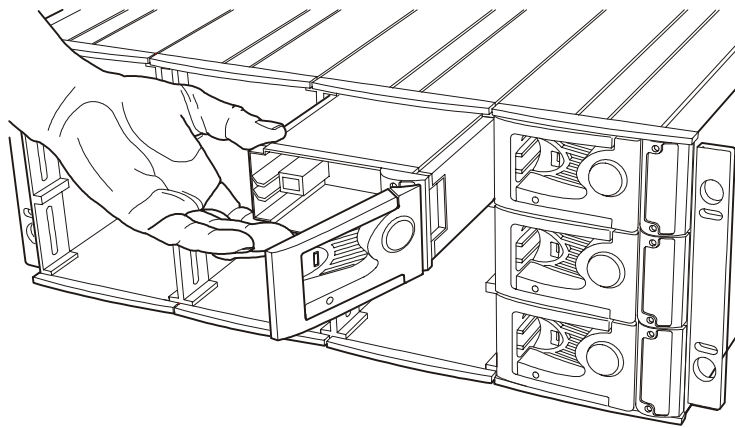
Installing an FC-AL Drive Carrier Module (2)
